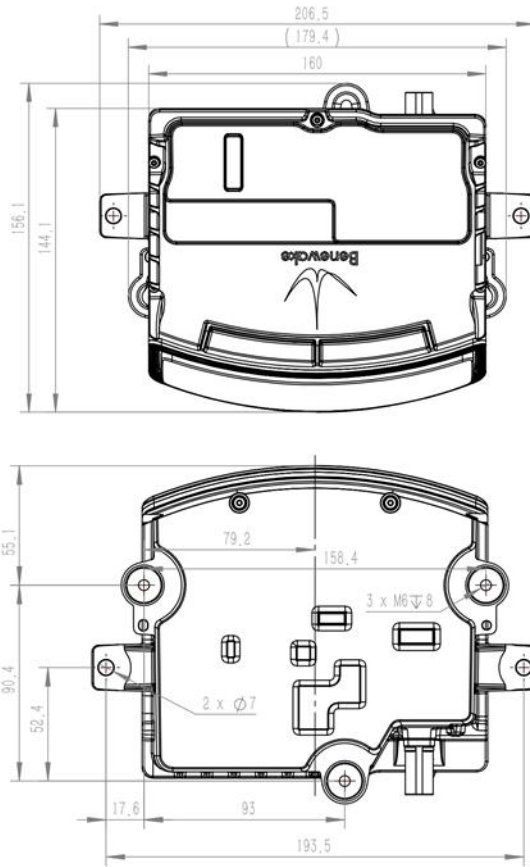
Top view (left) & bottom view (right) of the device(unit: mm)
